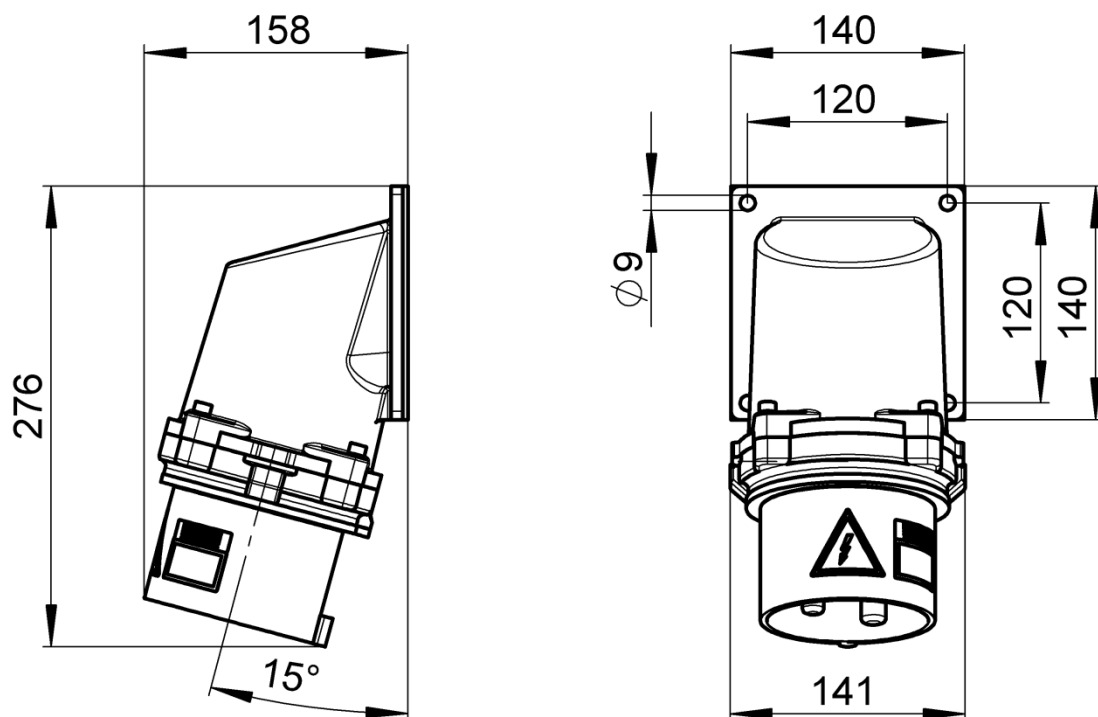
Dimensions Male Connector Panel (Angled) MCPA D-Line, C-Line (160A – 250 A) in mm
